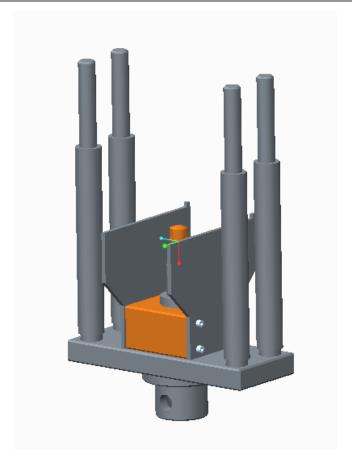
Lower assembly of mechanical system showing the position of the centring rods and sheet support.
